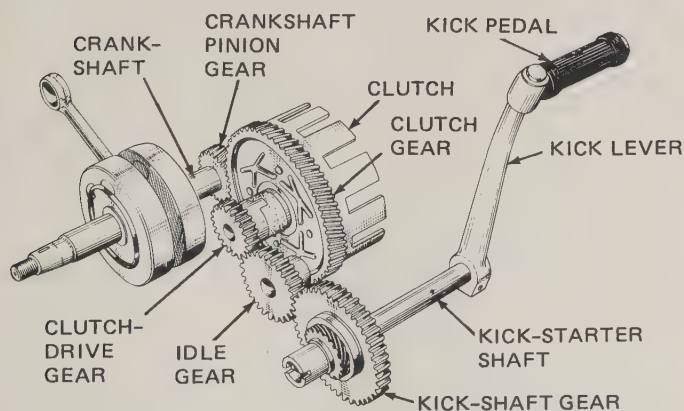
Gear train from kick lever to the gear on the crankshaft. (Suzuki Motor Company)
